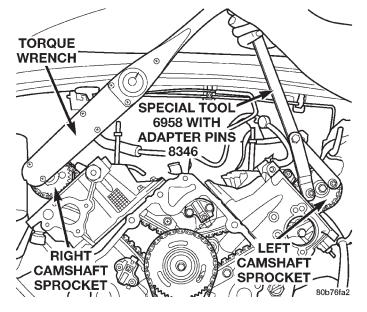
Tightening Right Side Camshaft Sprocket Bolt
